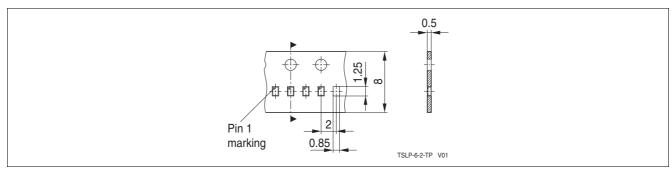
Tape & Reel Dimensions (reel diameter 180 mm, pieces/reel 15000)
